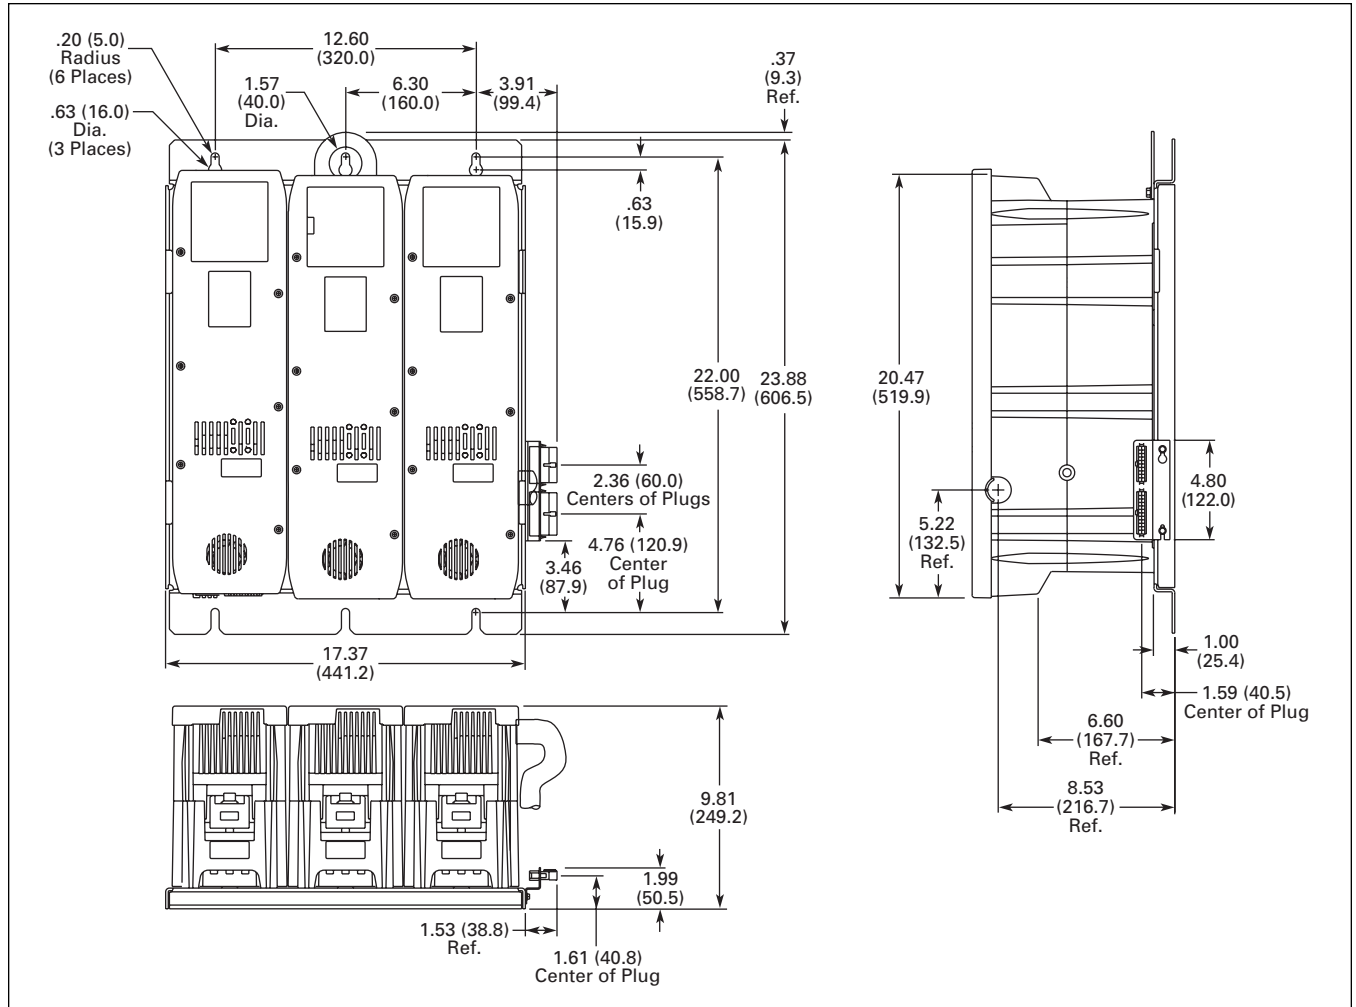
SMV801A — 2,500V AC — Approximate Dimensions in Inches (mm)
